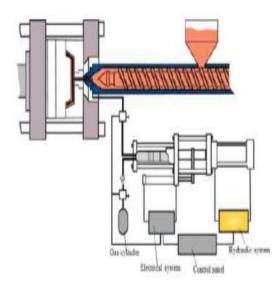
Schematic diagram of a typical injection molding machine adaptedfor gasassisted injection molding with anadd-on gascompression cylinder and accessory equipment.
